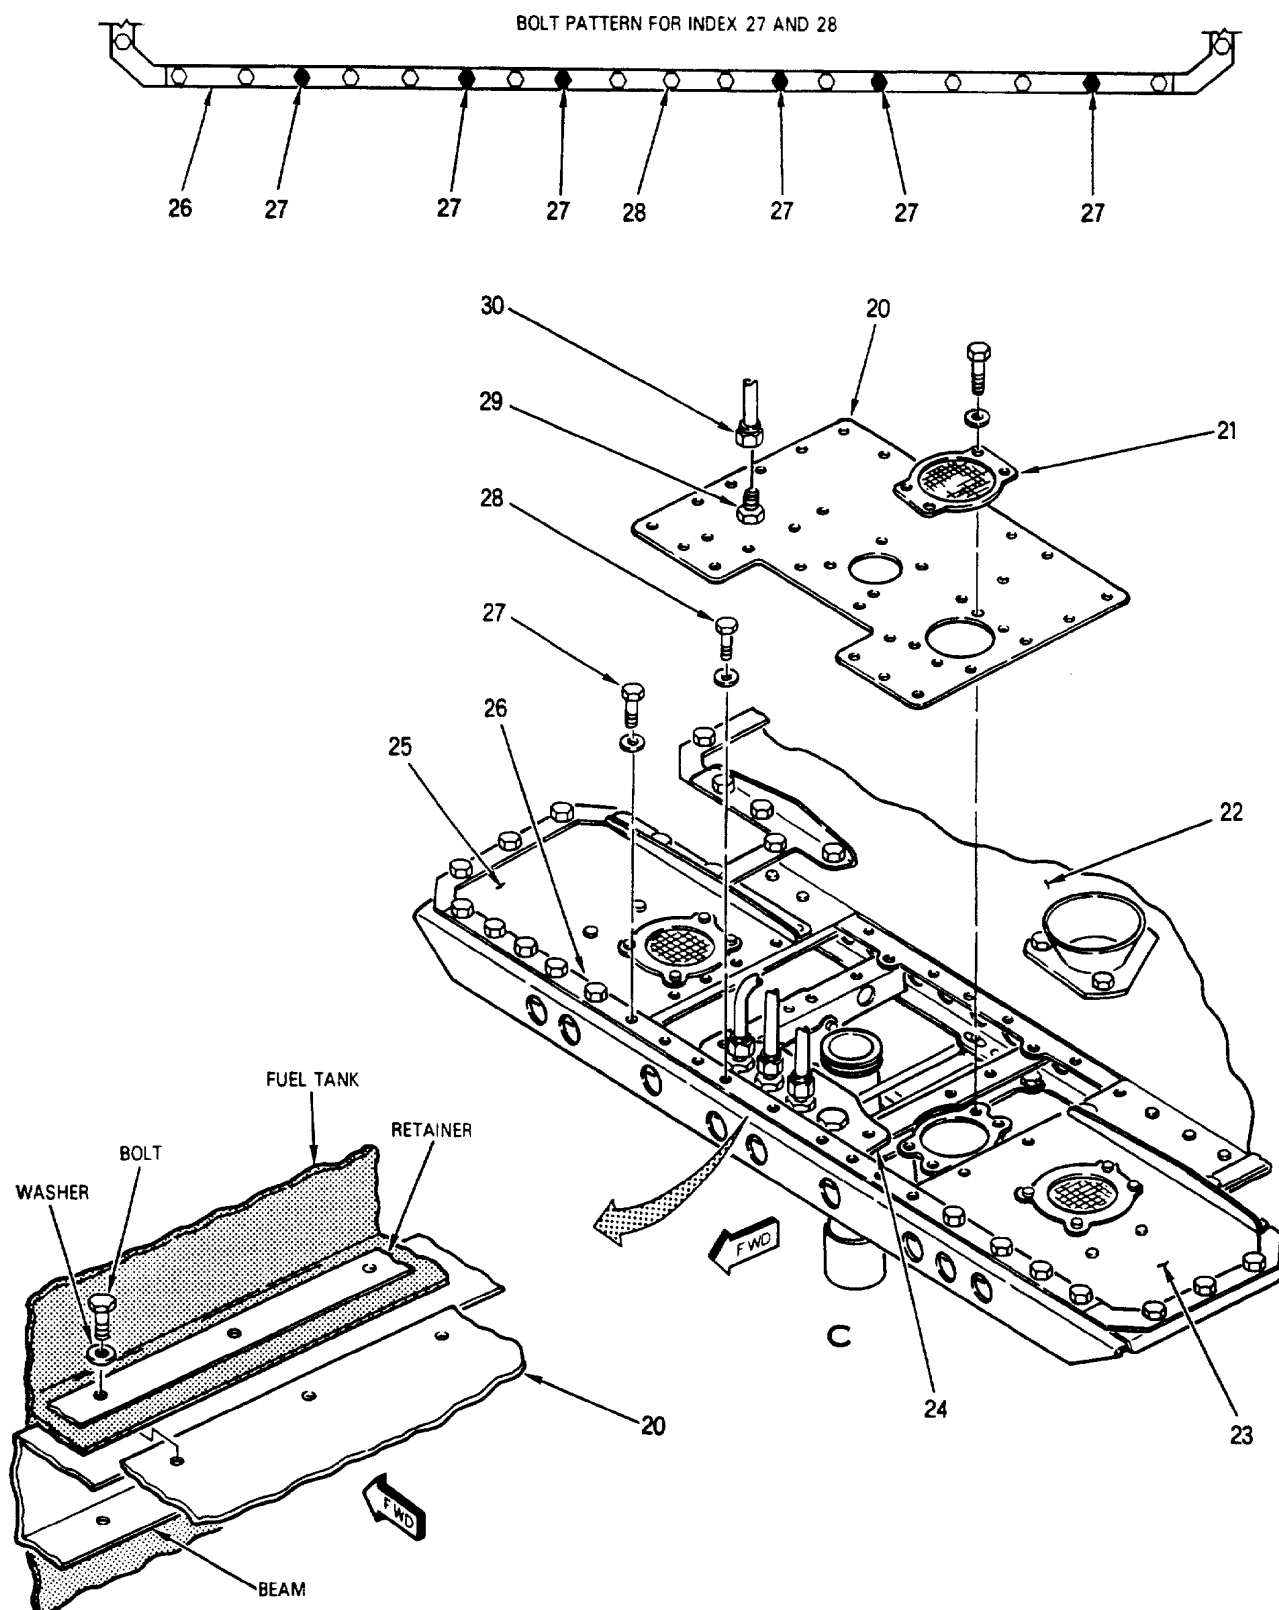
Defuel Valve (5VAP521) (Sheet 3)
